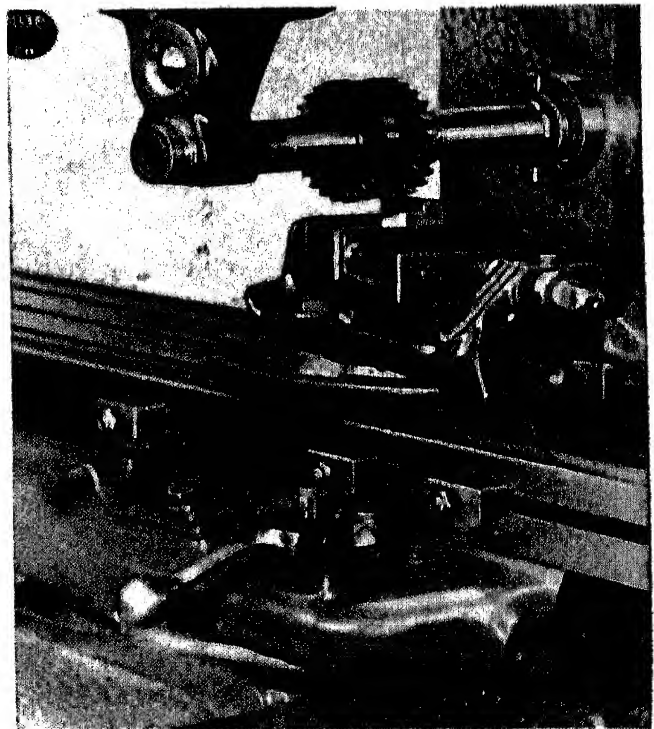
An application of a swivel vise. (Courtesy Kearney and Trecker Corp.)
